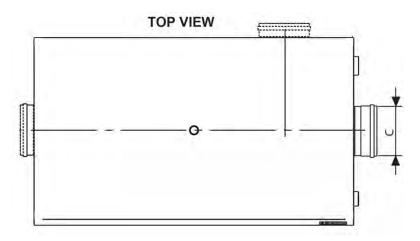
MODULEX EXT Dimensional Drawings (Top View)
